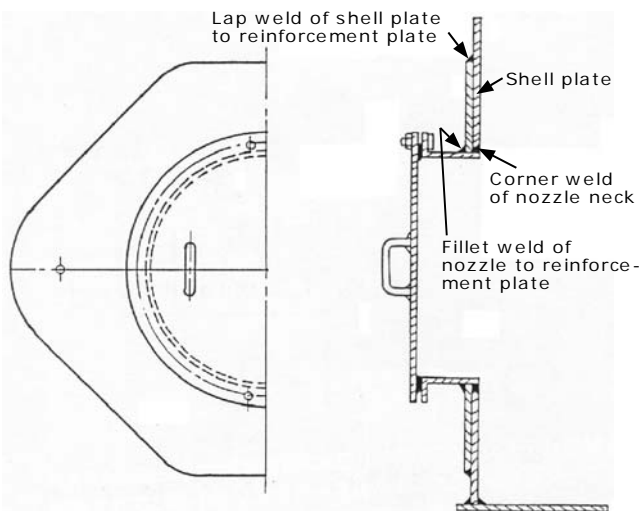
Welds at the periphery of a manhole equipped in a shell plate
